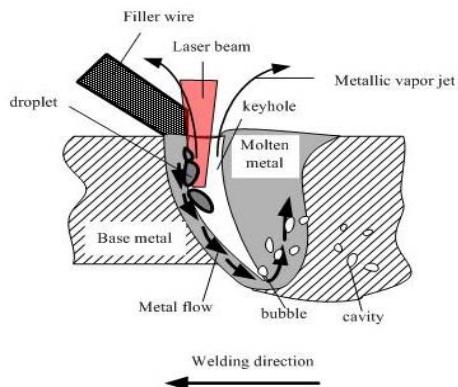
Gas cavity formation in laser welding with filler wire (the depth of penetration exceed the thickness of test plate).
